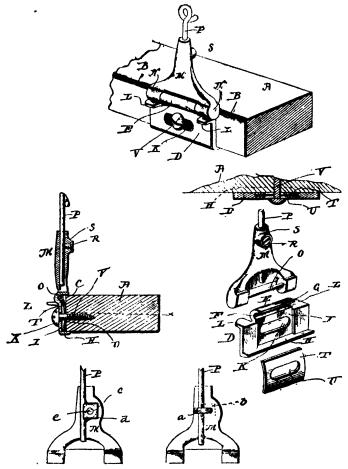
Adjustable Thread Board invented by Burt and Davol, 1890.
